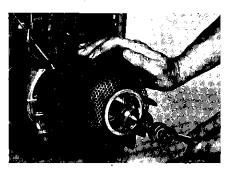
Install starter cup and screen (see Photo 15). Rotate cup until tang on the bottom goes in hole shown in Photo 47. Hold the flywheel and tighten nut very securely. Tighten to 360 inch-lbs. If flywheel nut isn't tight enough, the key will shear off when engine starts—and engine won't run.
